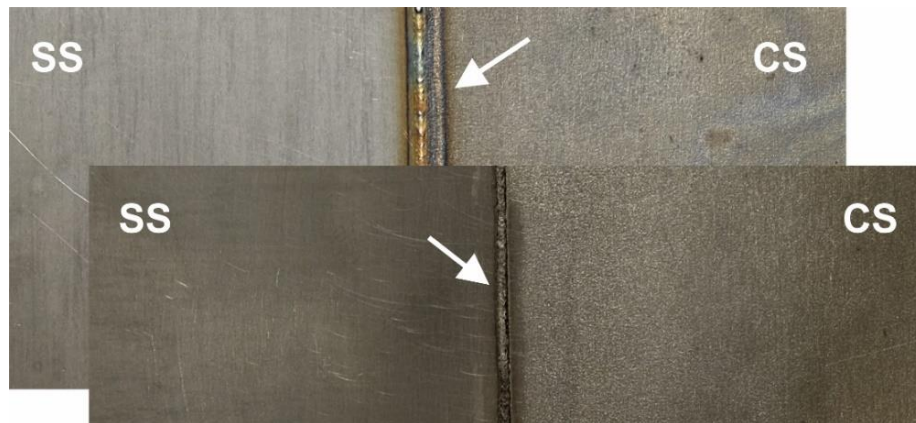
Image of the dissimilar laser welding with and without the SiO_2 flux; SS-stainless steel, CS-carbon steel [STA19].
